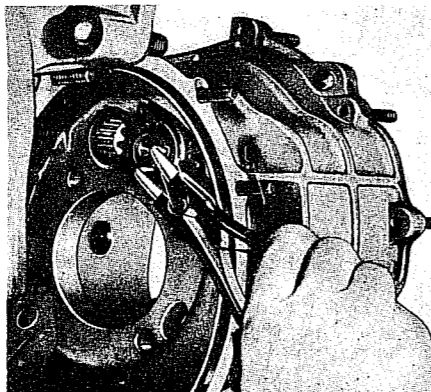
Removing the circlip retaining the reverse idler gear wheel.
